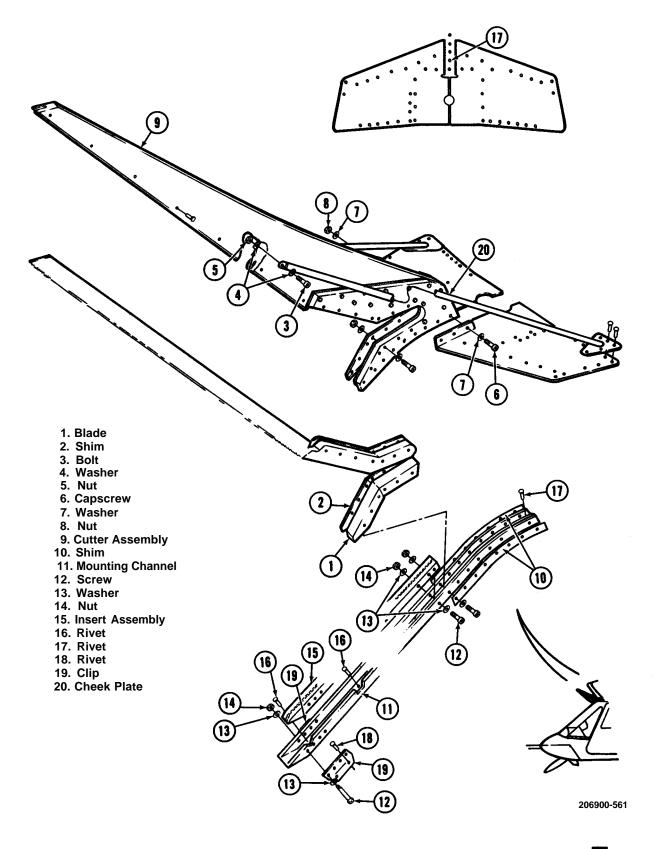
Removal – Channel, Sawtooth Insert and Upper Cutter Assemble
